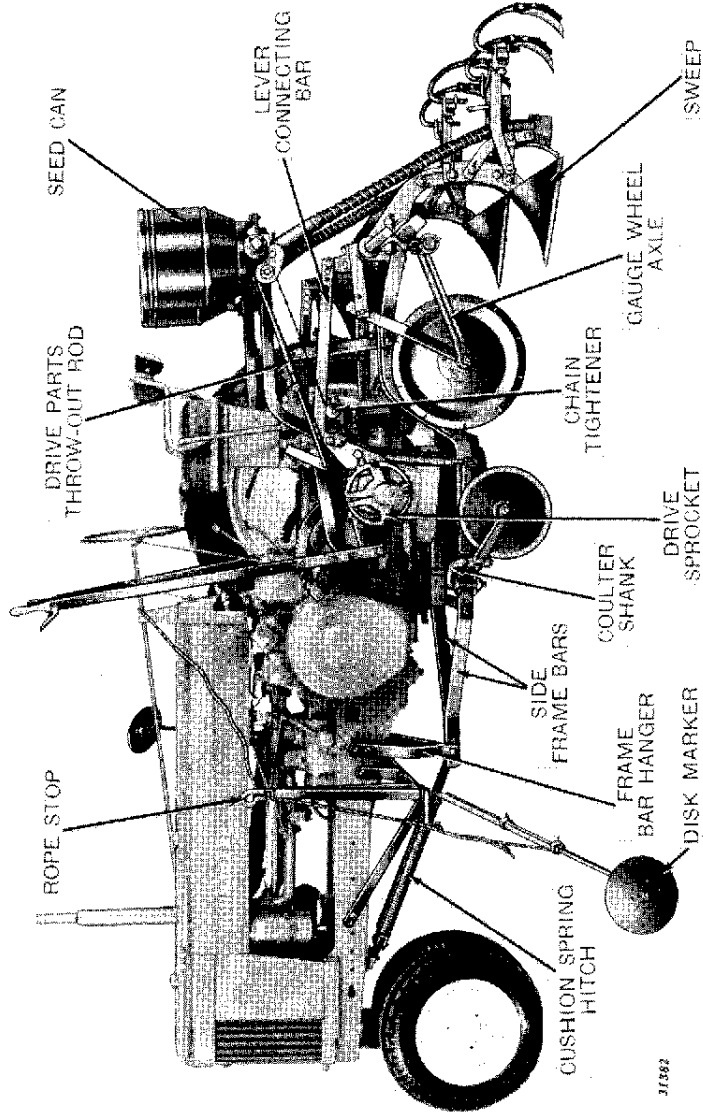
Side View of John Deere No. 52 Bedder with Planting Attachment
